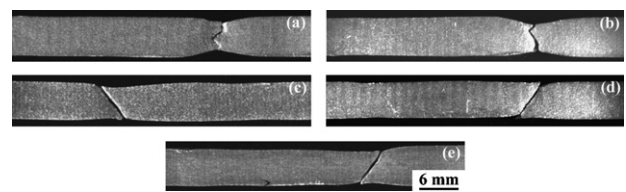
Appearance of failed FSW 6061Al-T651 joints: (a) 400 rpm, 100 mm/min; (b) 600 rpm, 100 mm/min; (c) 800 rpm, 400 mm/min; (d) 1200 rpm, 400 mm/min and (e) 1600 rpm, 400 mm/min. The advancing side of the weld is on the right in all the macrographs.
